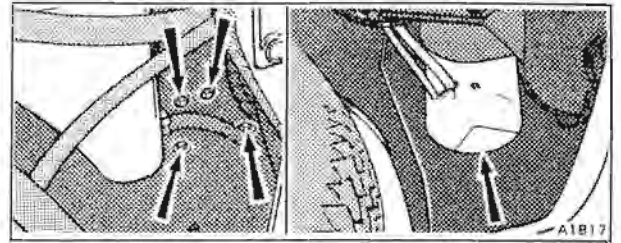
Fuel evaporative control canister and mounting bracket setscrews.
